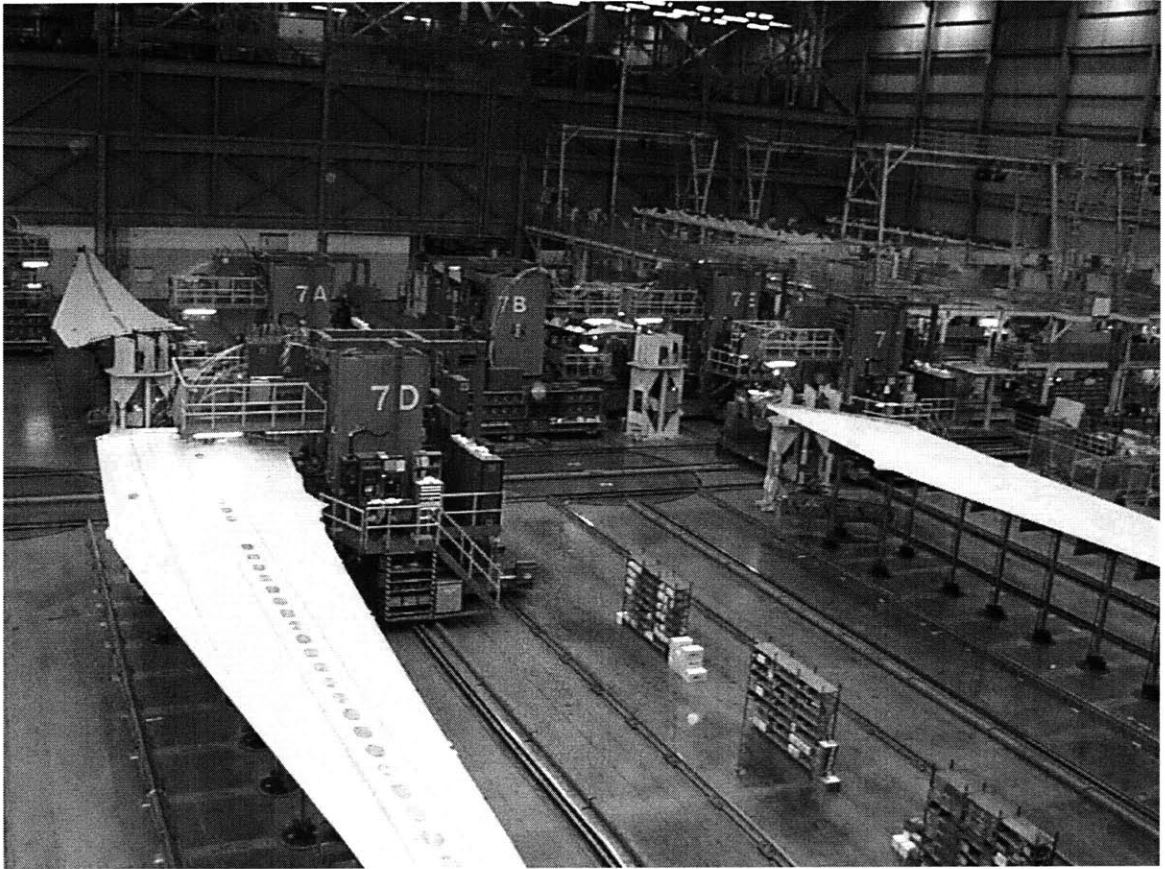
Airbus Assembly - Tacking & Cleanup Fixtures [8]
